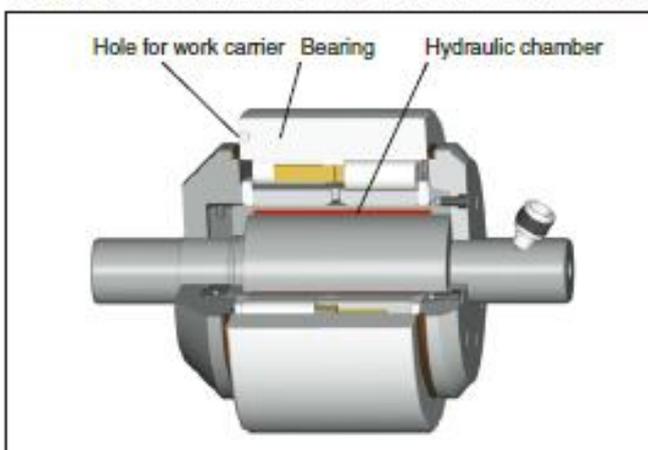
Typical Installation of Suitable Bearing on Jig Type 1
